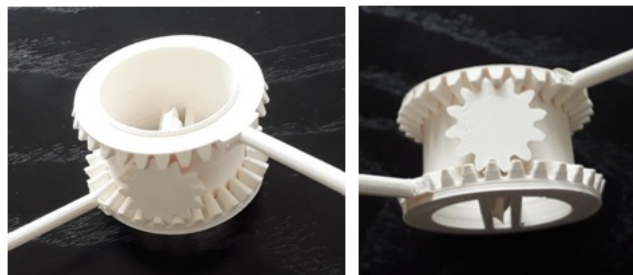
Main mechanism: the bisector (eventually added by a constant angle) is obtained thanks to three conical gears. The position of the little conical gear gives the direction of the wheel that touches the plane.
